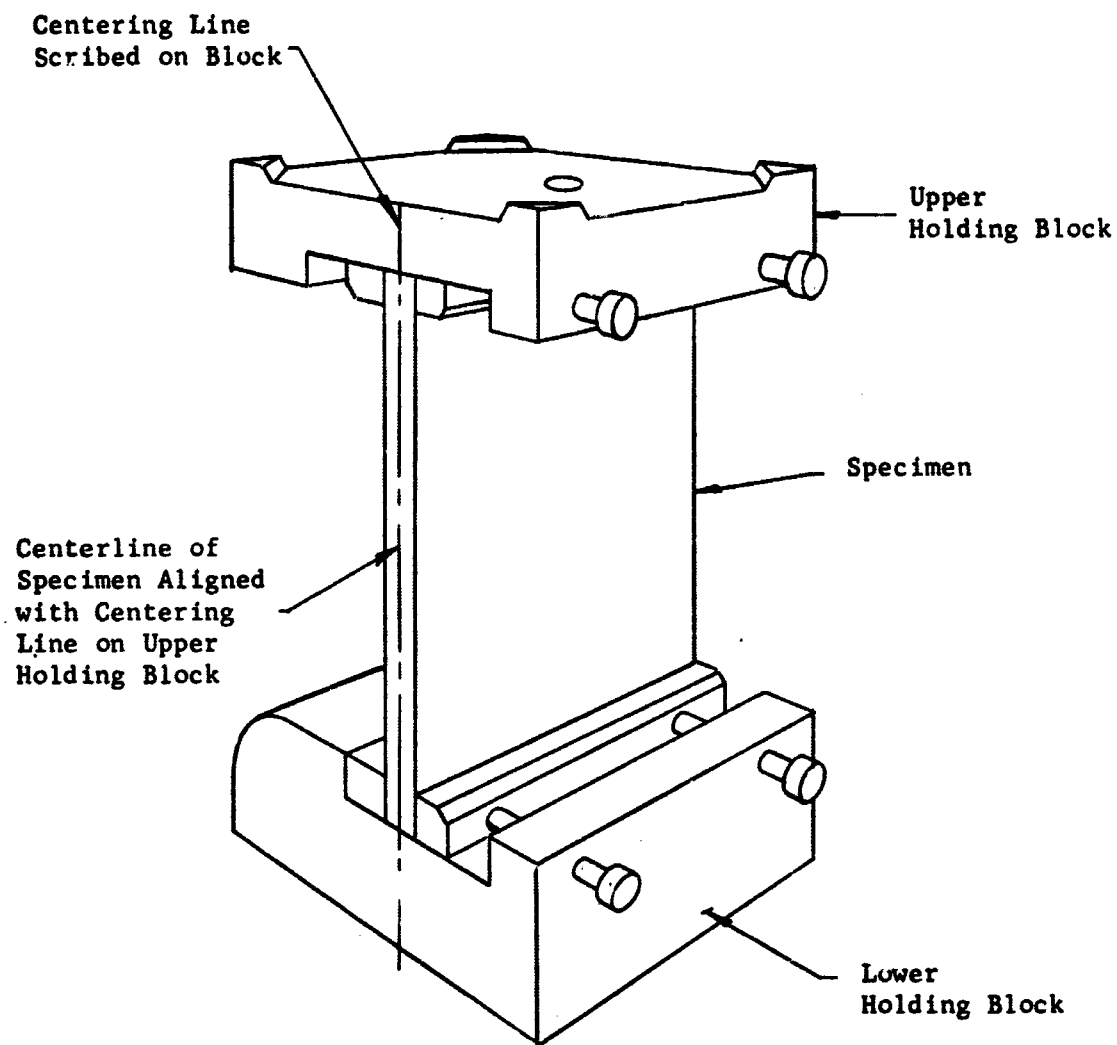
Compressive Specimen Aligned in Holding Blocks.
